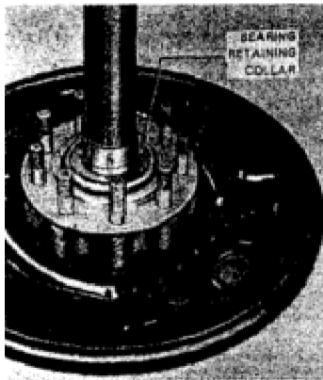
On model 2000 tractors with round axle housing, axle shaft bearing is retained by lock collar as shown. On other models, a self-locking nut is used; refer to Fig. 327.
